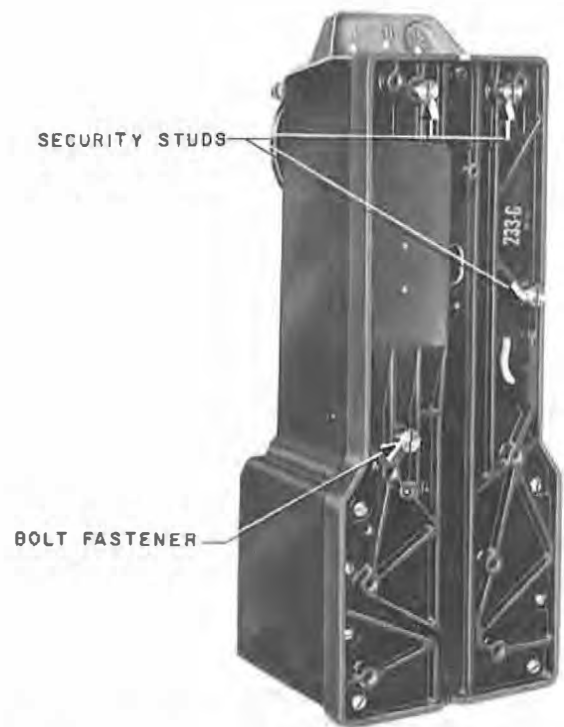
Location of Security Studs and Bolt Fastener on Aluminum Backplate
